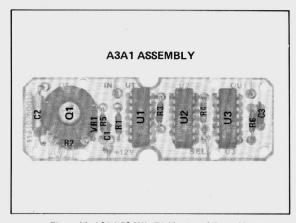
A3A1 50 MHz Divider Board Assembly Component Locations
